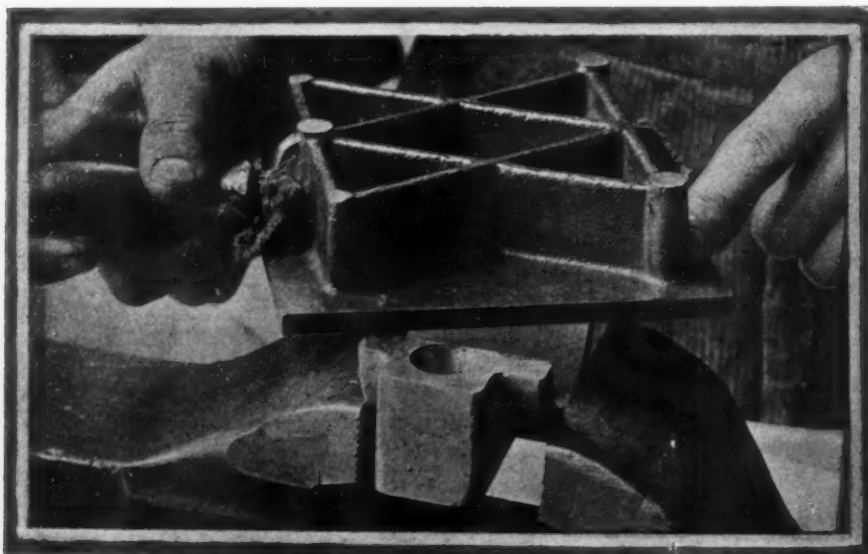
Showing the use of a surface plate that has been blued on the support blocks to insure the filing is uniform
